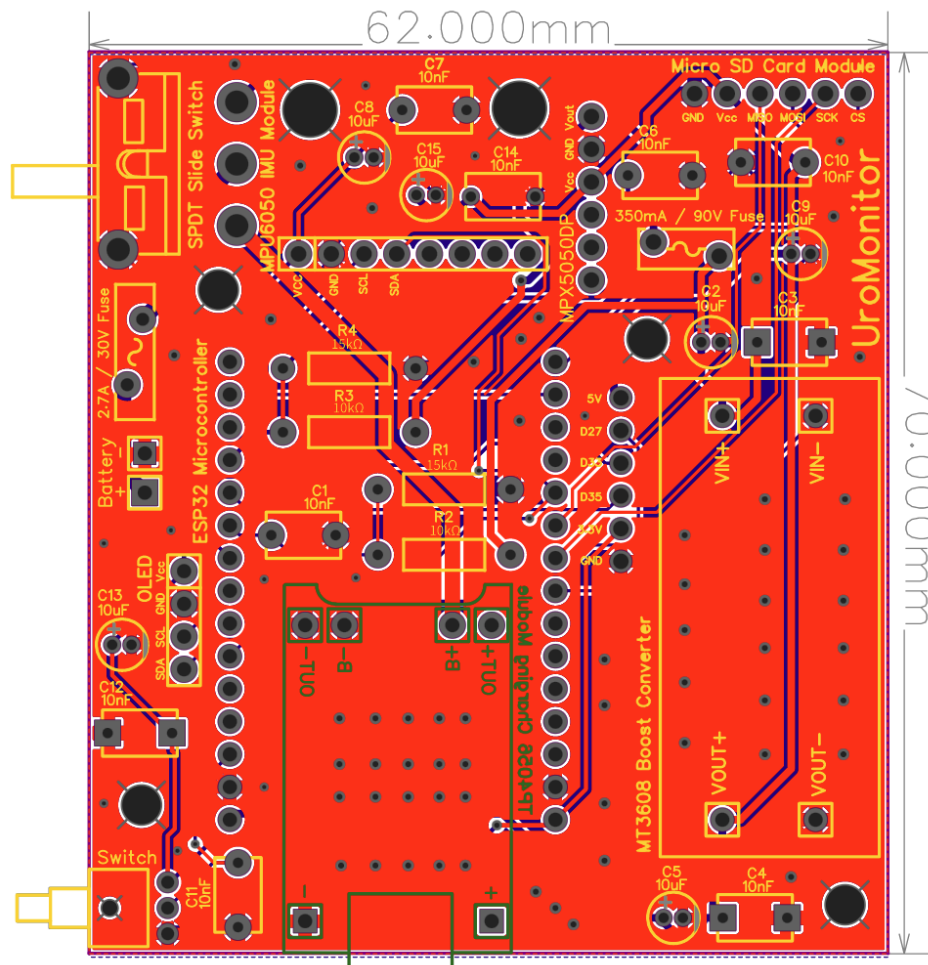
PCB layout of the UroMonitor board showing component placement, routing, module footprints (ESP32 microcontroller, MPX5050DP pressure sensor, MT3608 boost converter, TP4056 charger, and microSD module), and silkscreen layers. Designed in EasyEDA [289].
